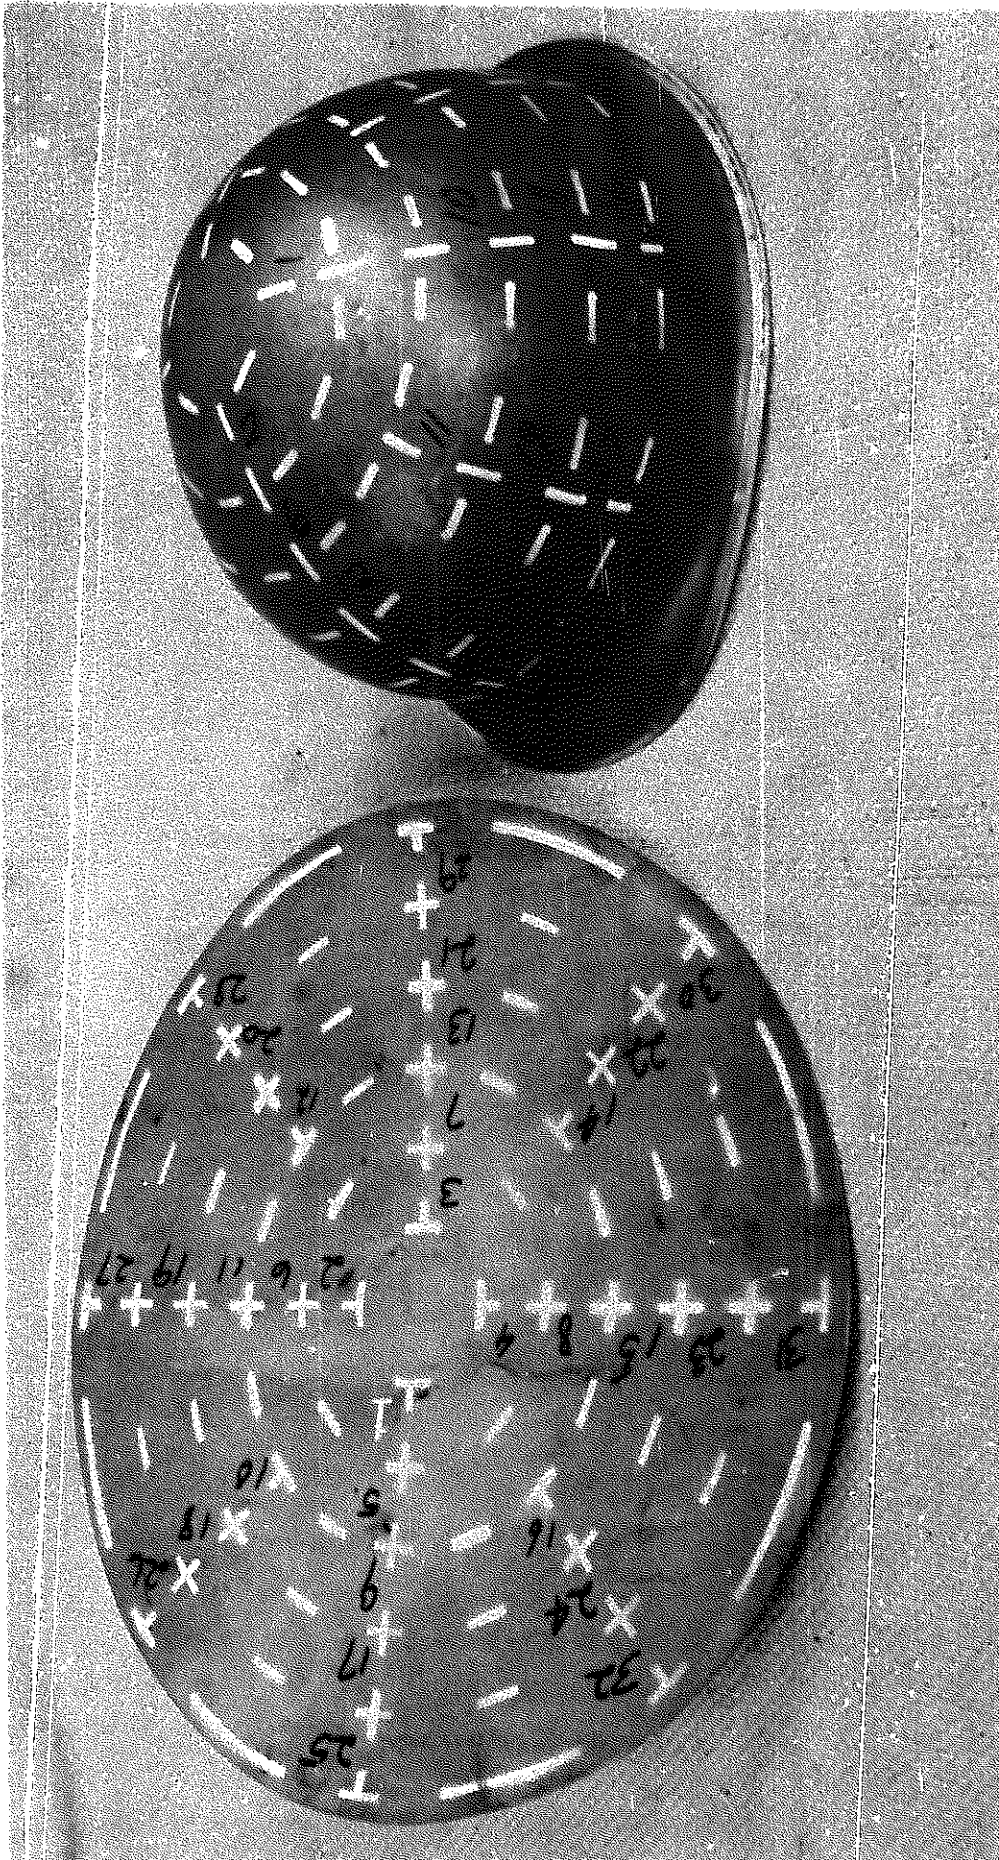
ZONE LAYOUT ON HELMETS AND BLANKS
